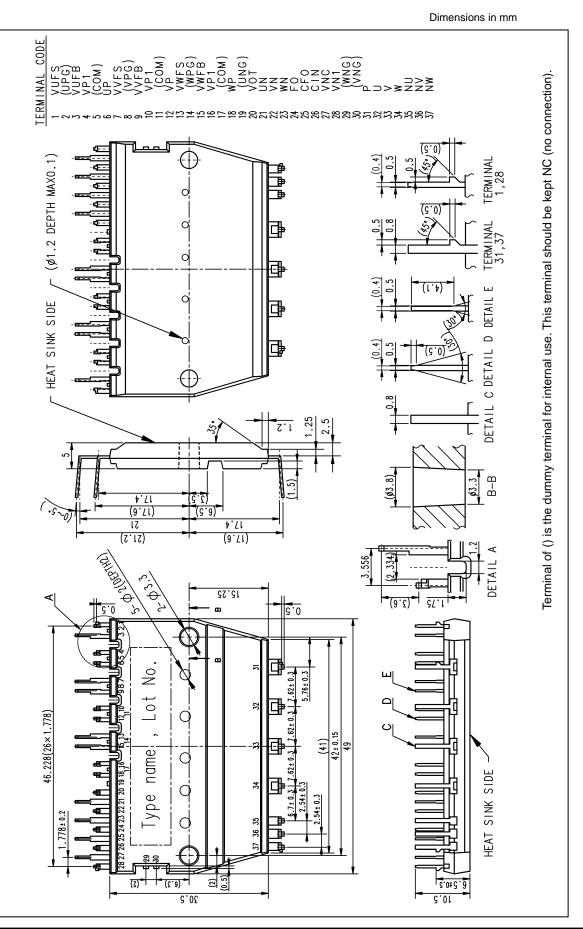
Package Outlines PSSxxS51F6-C (Control side zigzag terminal type)
